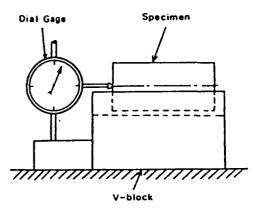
Assembly for Determining the Perpendicularity of End Surfaces to the Specimen Axis
